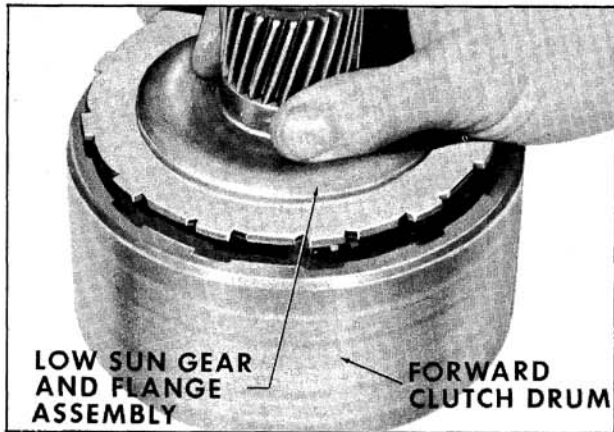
Installing Low Sun Gear and Flange Assembly
